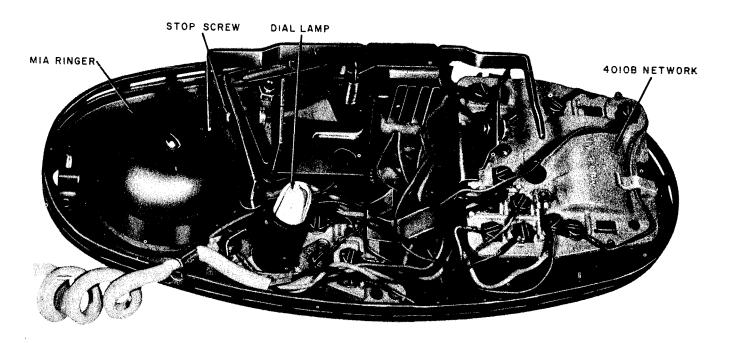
702-Type Telephone Set, Dial and Housing Removed
